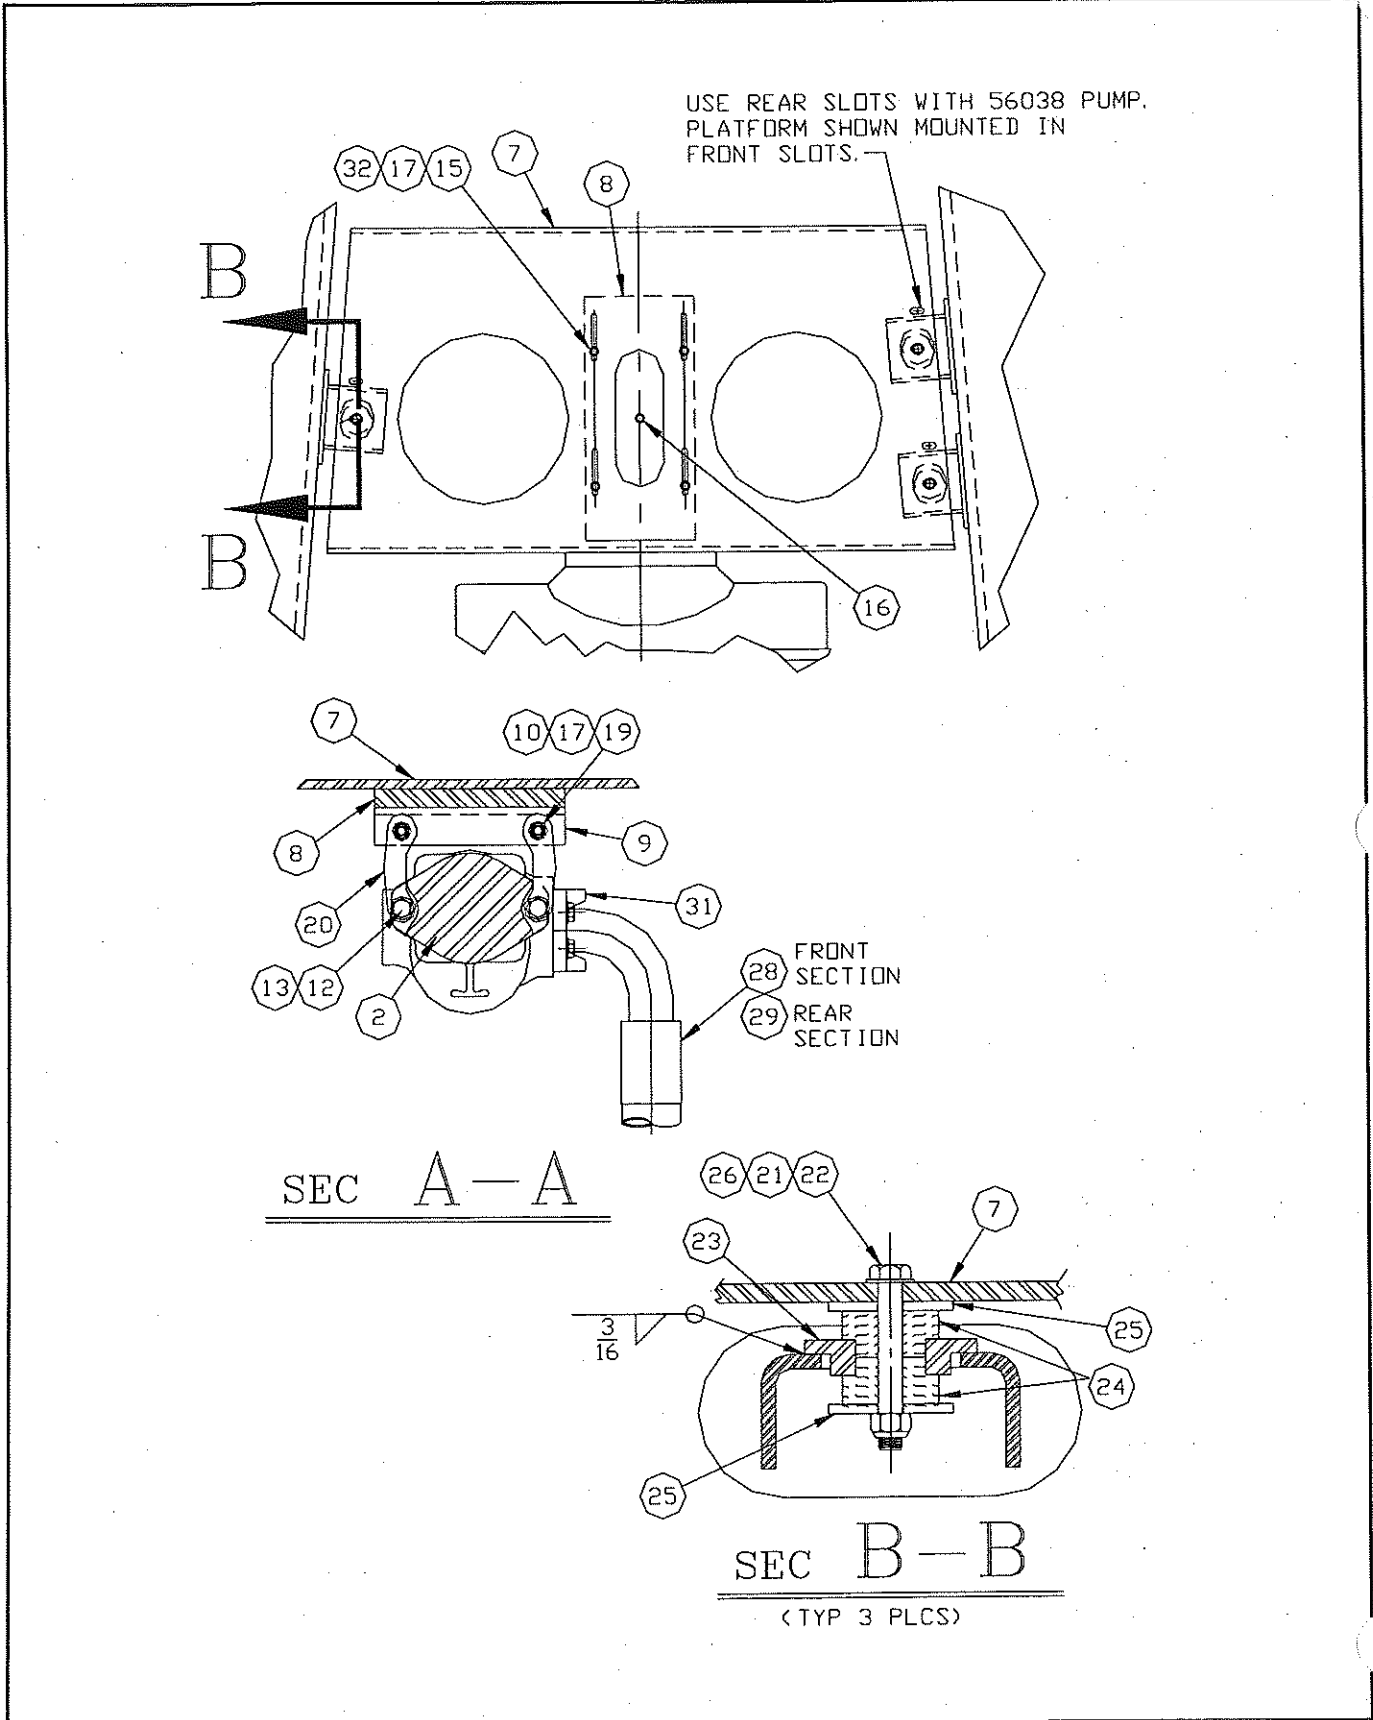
HYDRAULIC PUMP DRIVE ASSEMBLY (A85186, SHEET 2 OF 3)
